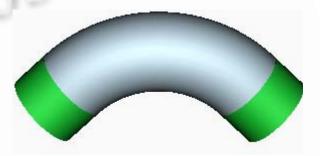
A mandrel with flange; gray for elbow and drak gray for flange
